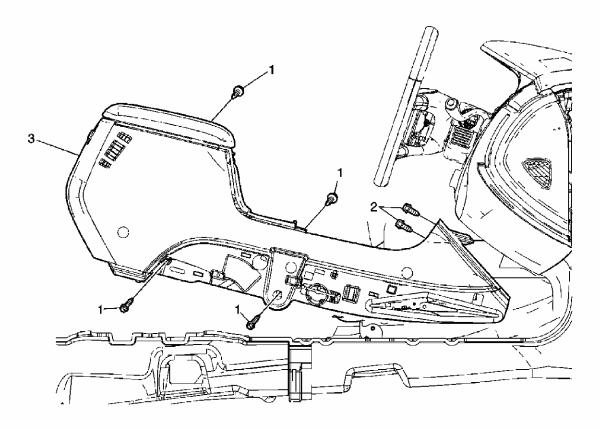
Removing/Installing Console Courtesy of GENERAL MOTORS CORP.
